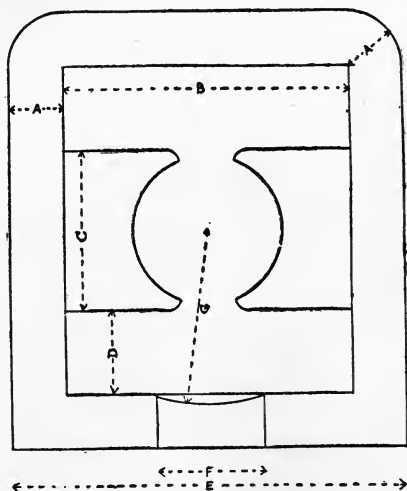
SIDE VIEW IRON-CLAD MAGNET.
